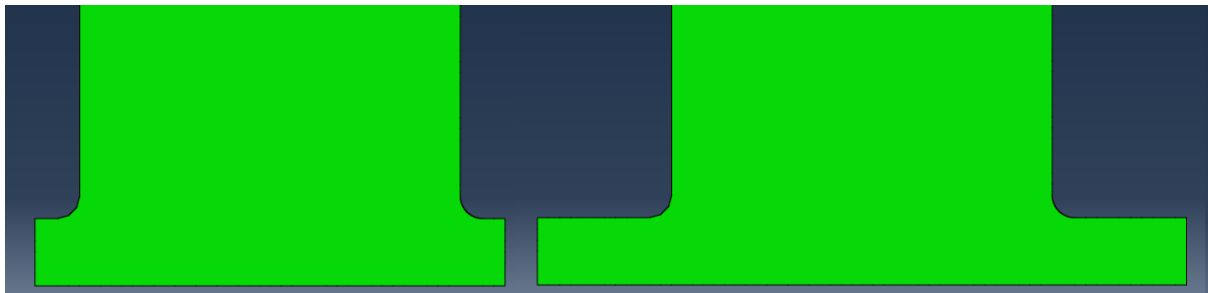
Weld bead central notch height models showing the smallest (left) and the largest (right) models, 2 mm to 6 mm
